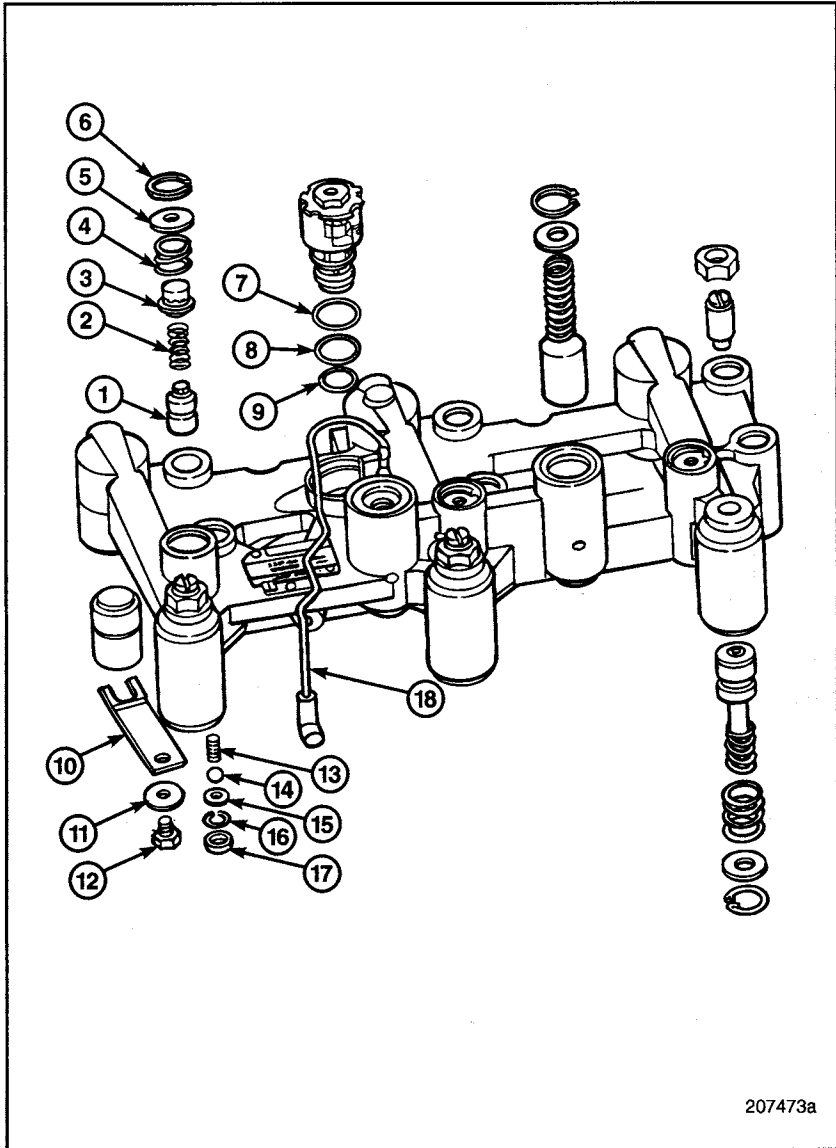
J-Tech Engine Brake Tune-Up Kit
